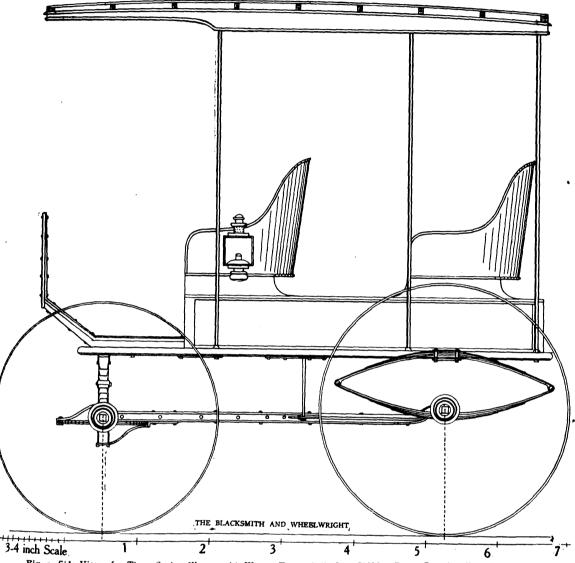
Side View of a Three Spring Wagon with Wagon Top and Six Iron Shifting Posts, Carrying Four Passengers.
